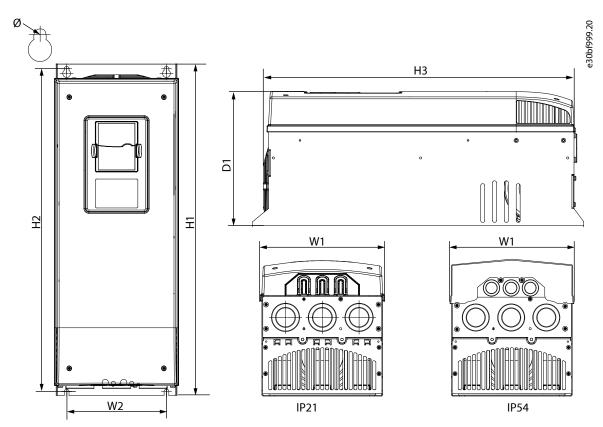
Dimensions of the VACON® NXS/NXP AC Drive, FR7
